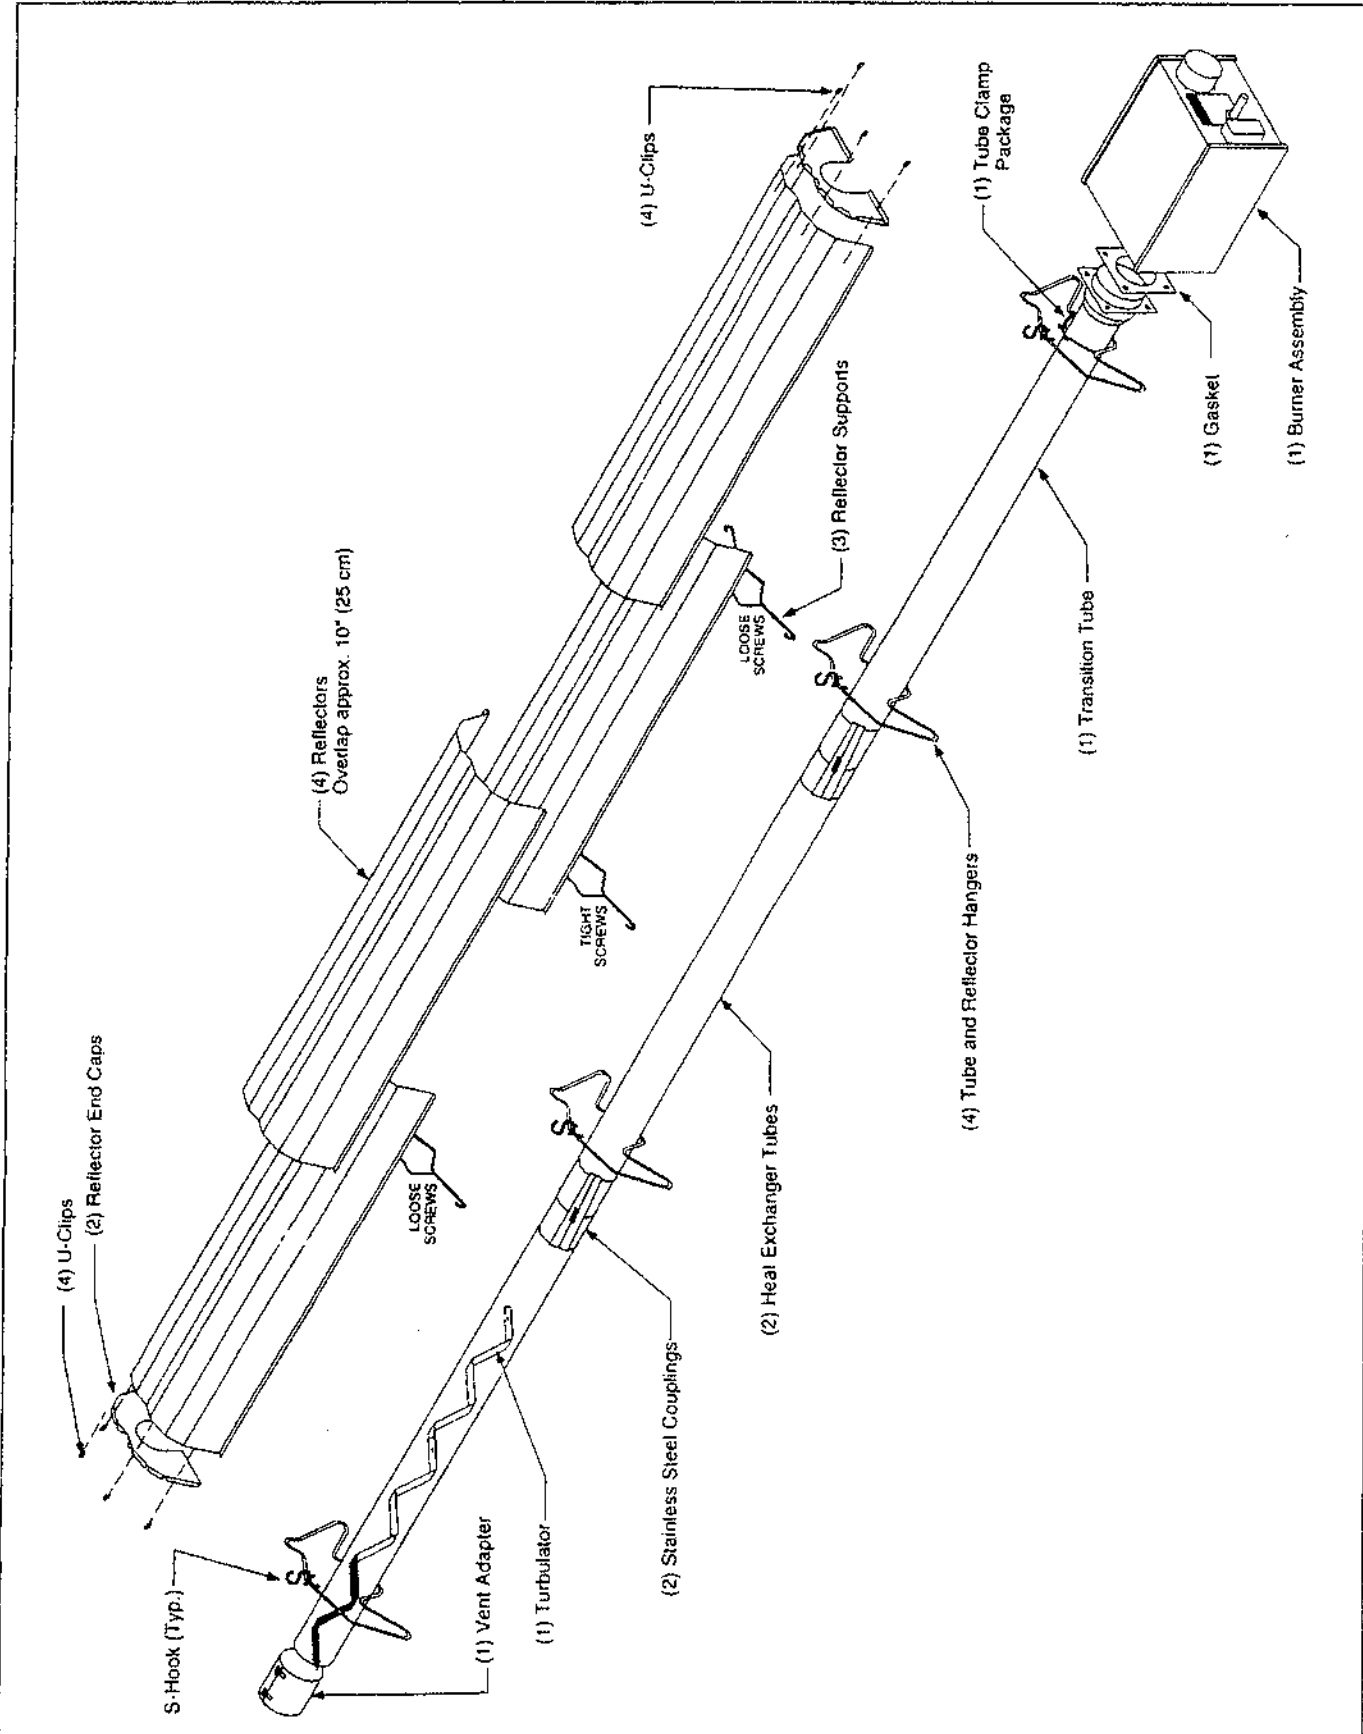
Assembly of 30 ft (9 m) Heat Exchanger System
